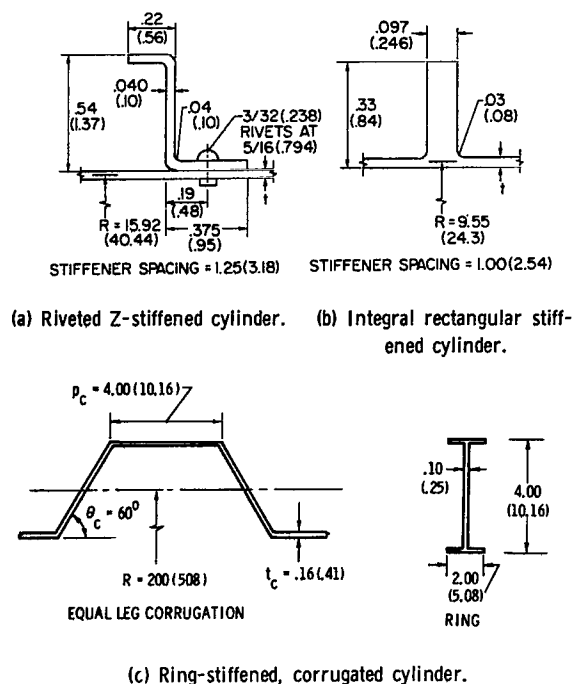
Dimensions of stiffened cylinder cross sections. All dimensions are in inches (centimeters).
